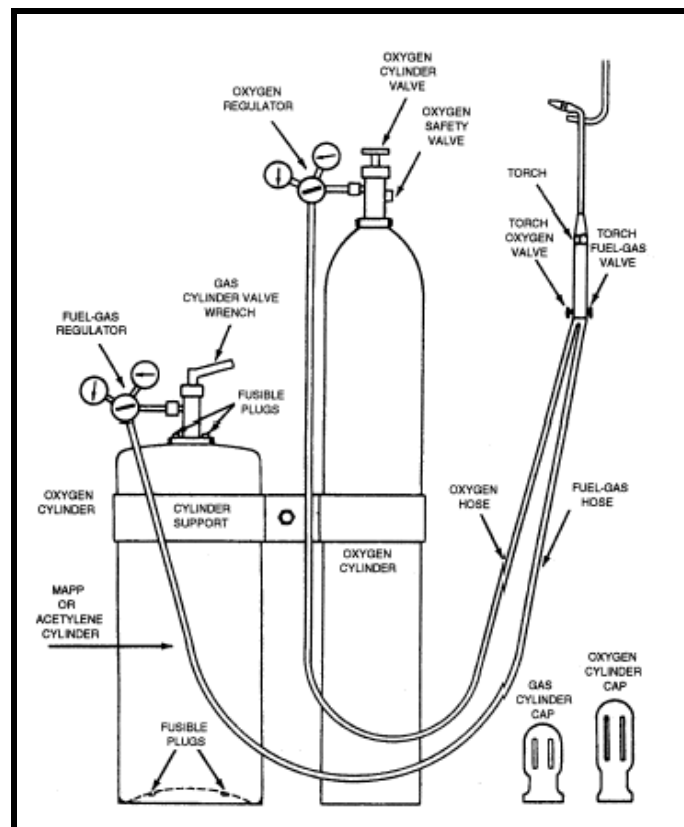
Schematic representation of gas welding/ cutting equipment.
